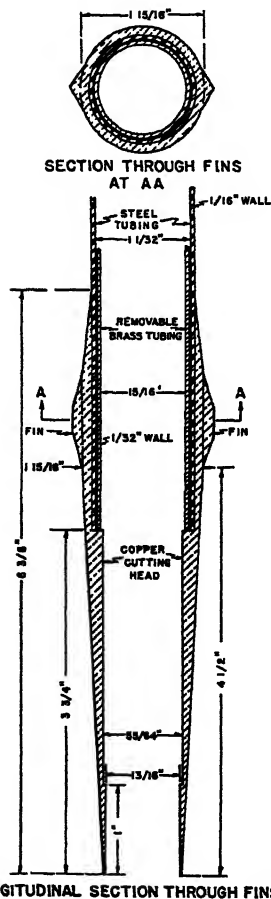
SECTIONAL DIAGRAM OF THE CUTTING HEAD
